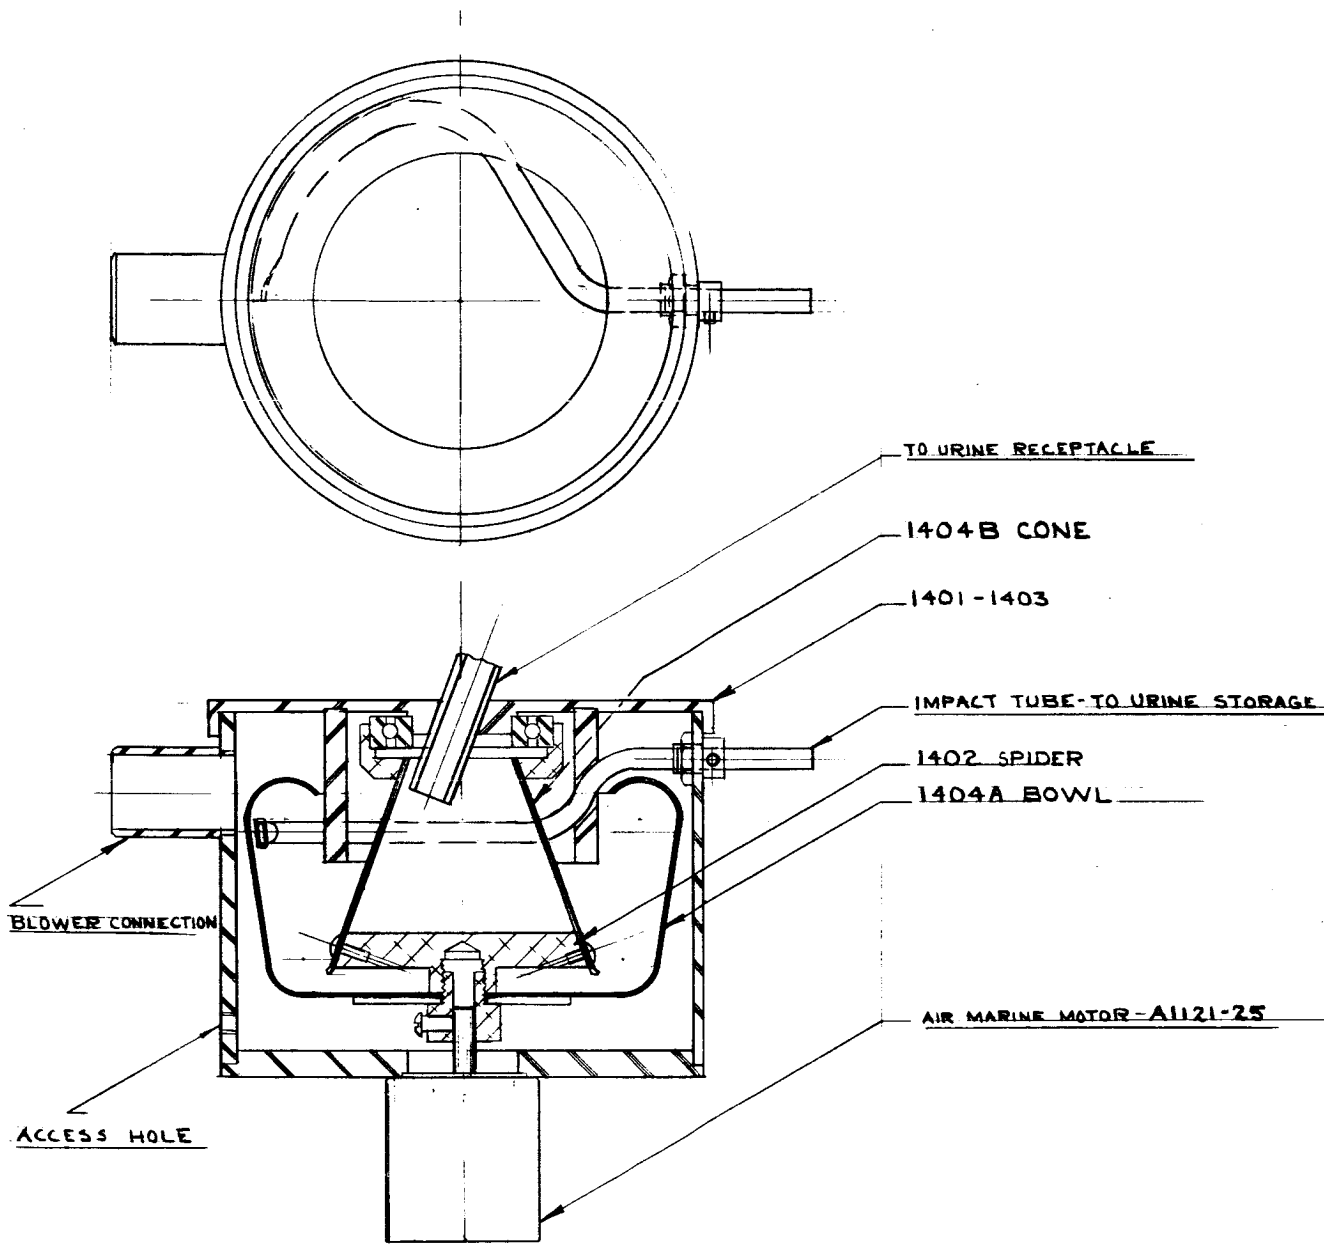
ASSEMBLY DRAWING OF CENTRIFUGAL SEPARATOR
